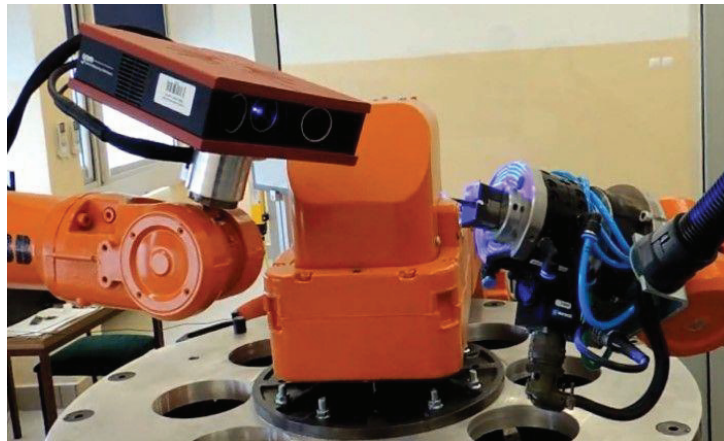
Measurement of blade geometry with the use of a 3D scanner.
